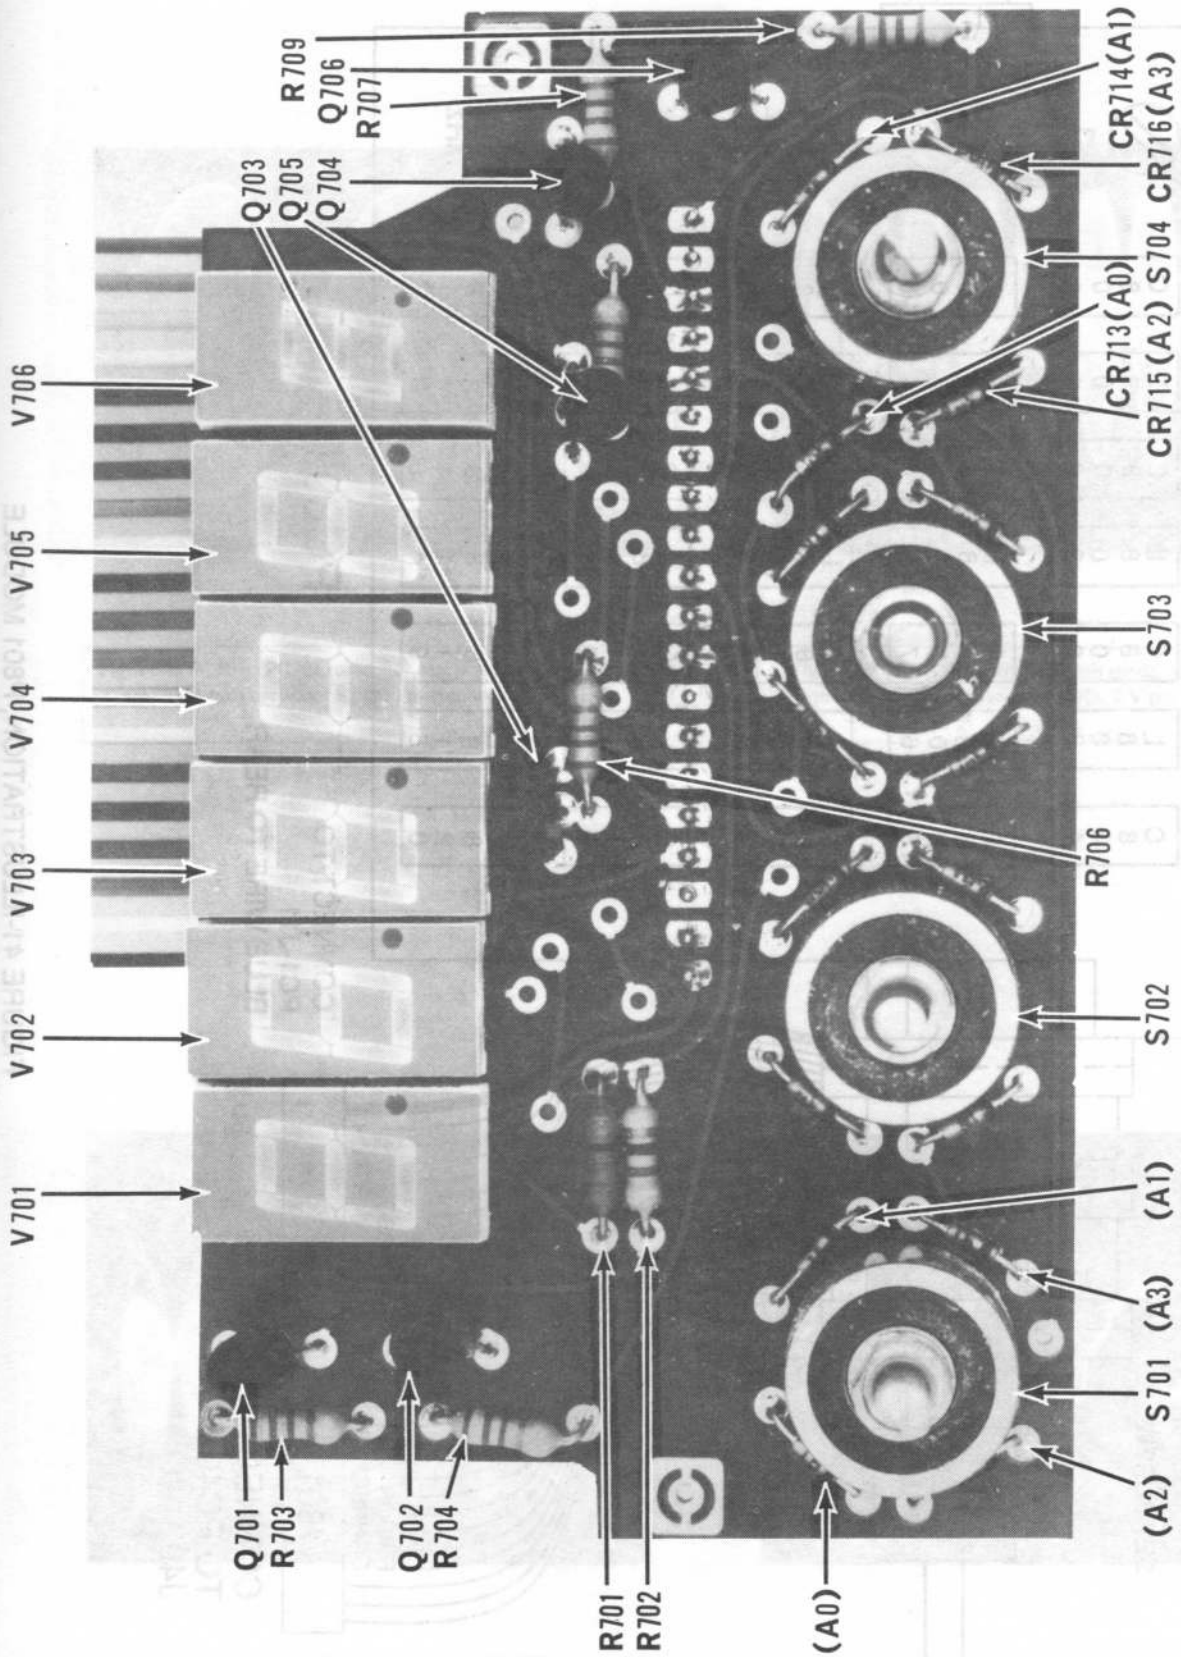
PHOTOGRAPH, PC701, SHOWING COMPONENT LOCATIONS
